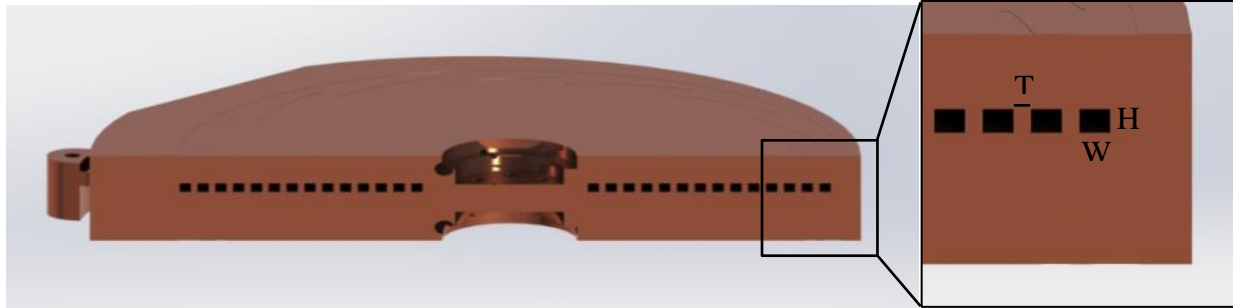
Cross-sectional view of the baseplate. The inset shows the dimension nomenclature for the channel geometry.
